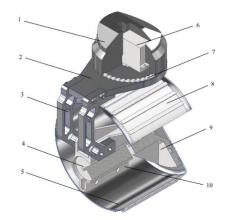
Design of the turning module: 1 - bearing cover; 2 - bearing lower plate; 3 - supports; 4 - PCB; 5 - wheel; 6 - servo drive; 7 - bearing balls; 8 - tire; 9 - wheel attachment; 10 - motor holder
